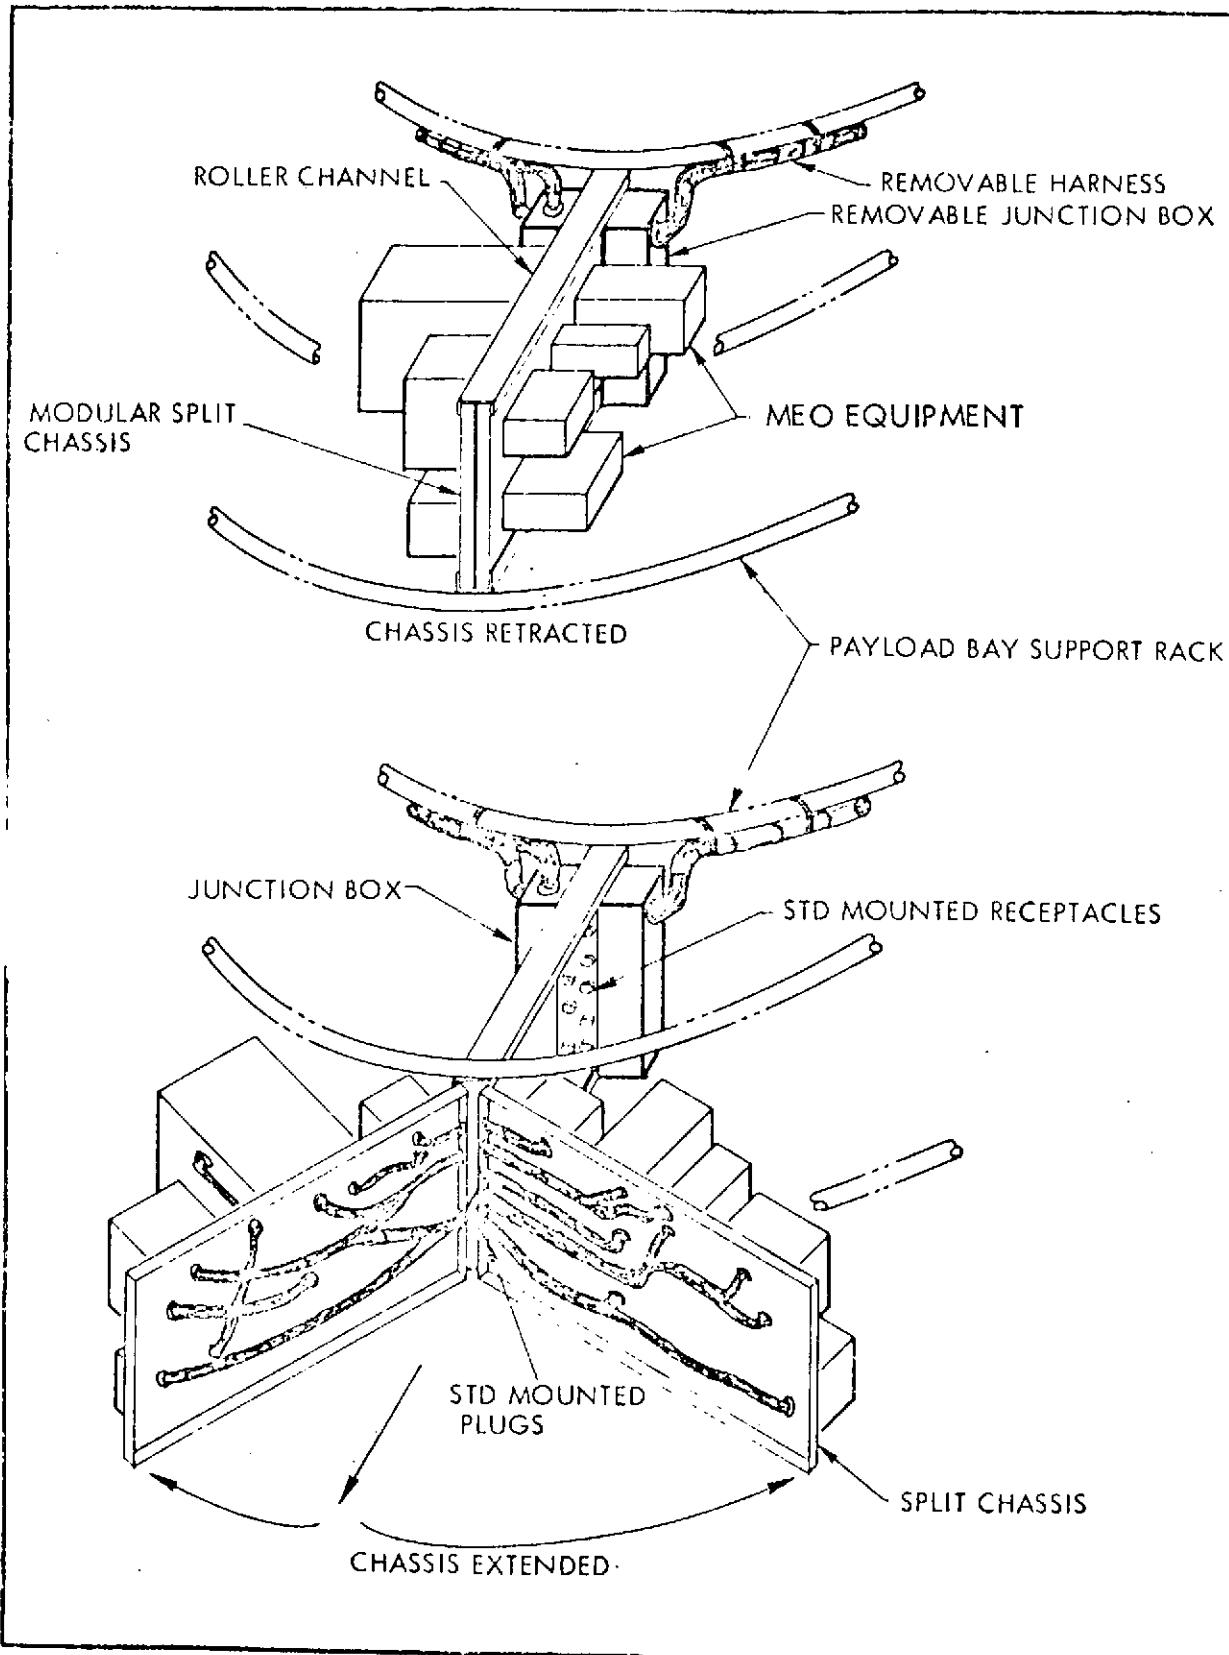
Equipment Rack - Modular Pullout Split Chassis
